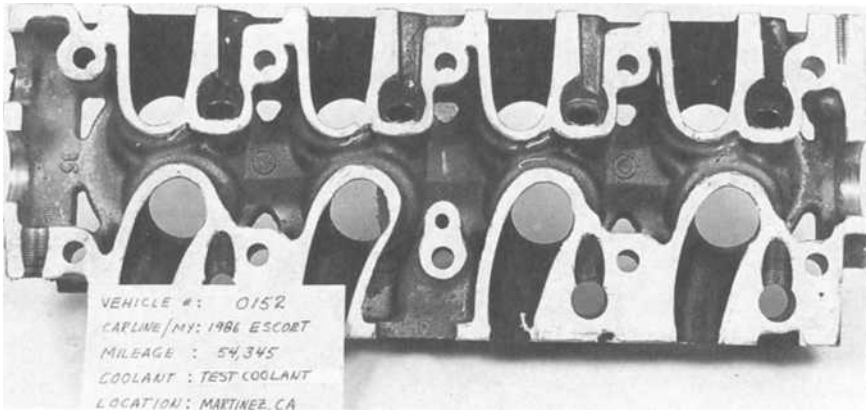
Cylinder head cooling jacket of Vehicle 0152.
